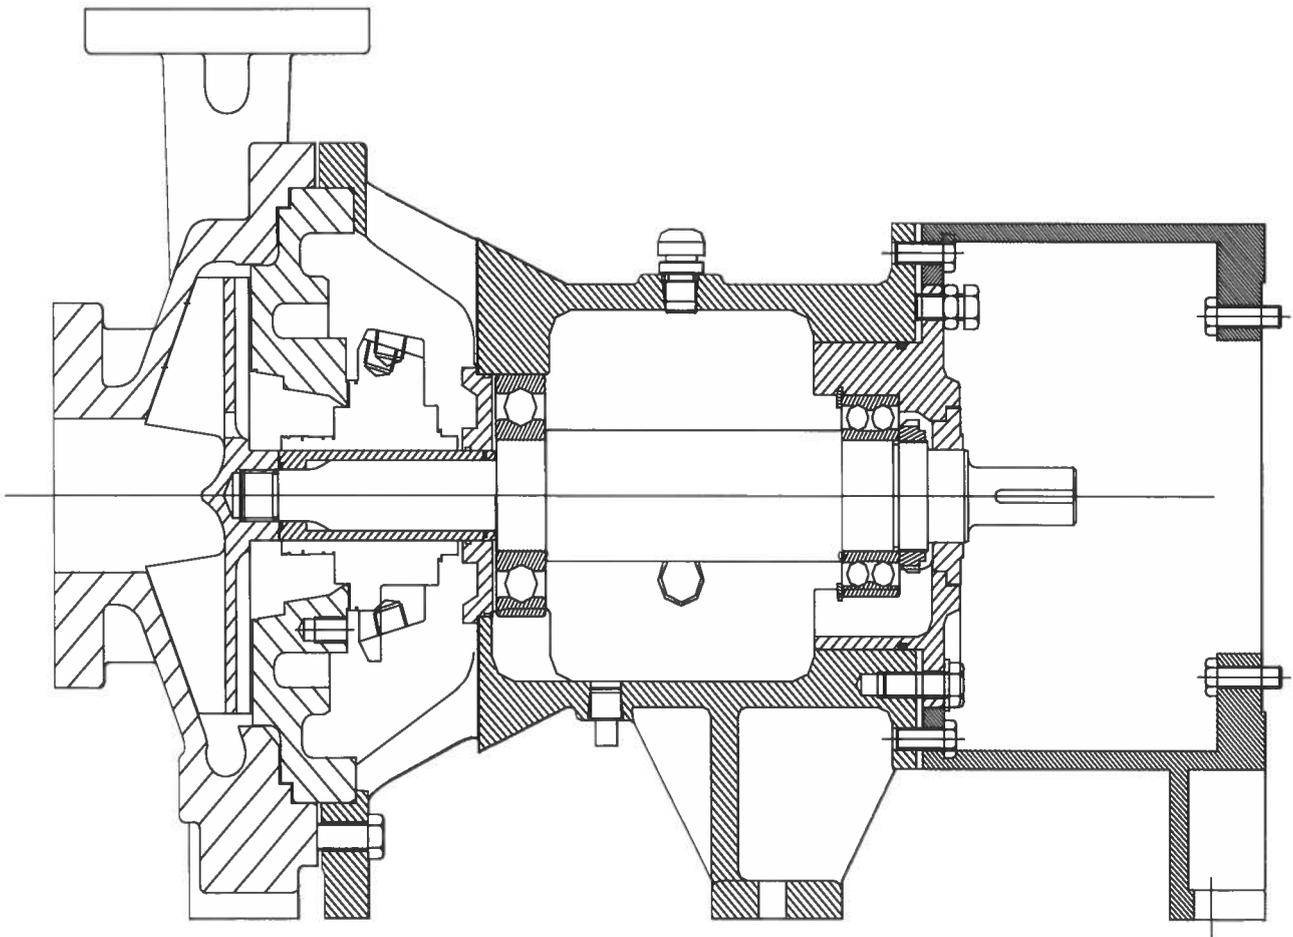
Pump with C-frame motor adapter, short coupled
